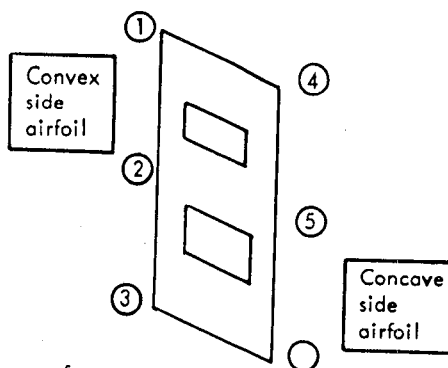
Failure surface, gasifier rotor blade No. 31, engine C-4, TD14.
